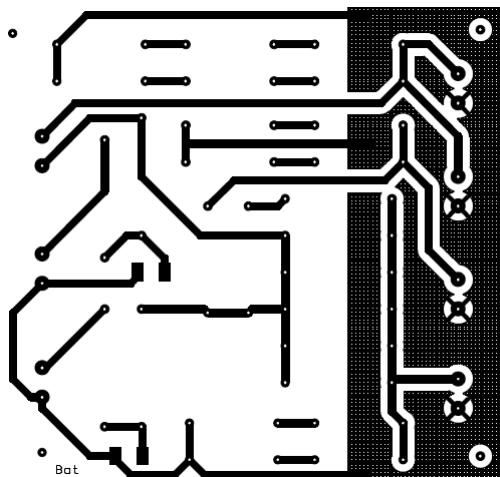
Layout of the bottom layer of the CV measurement probe pcb board.
